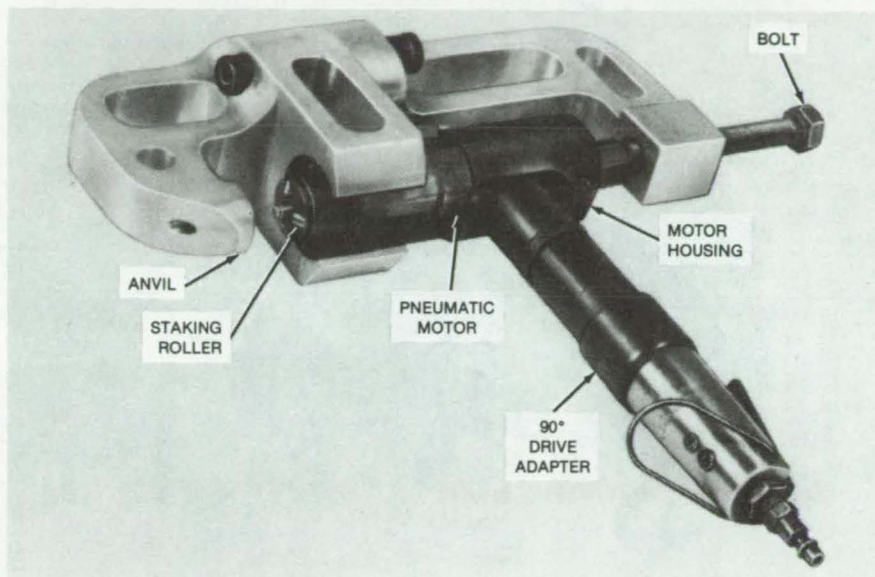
The Roller Staking Tool is constructed like a C-clamp to grip the workpiece and apply the axial staking/clamping compression.
